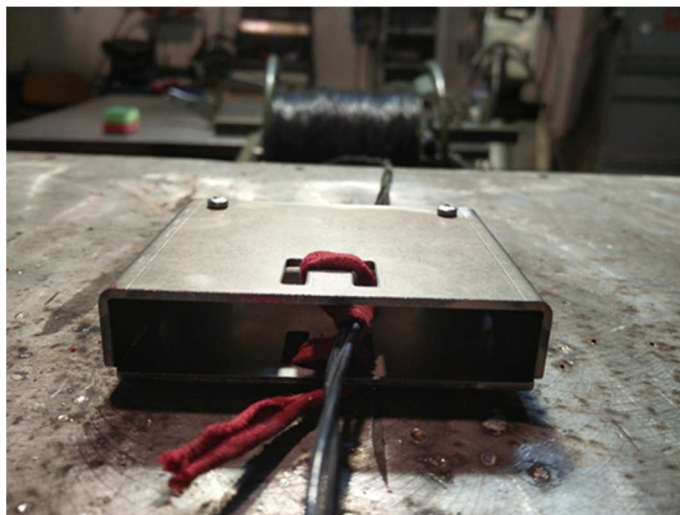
Assembly of maintenance mechanism cleaning a cable with a piece of rag
